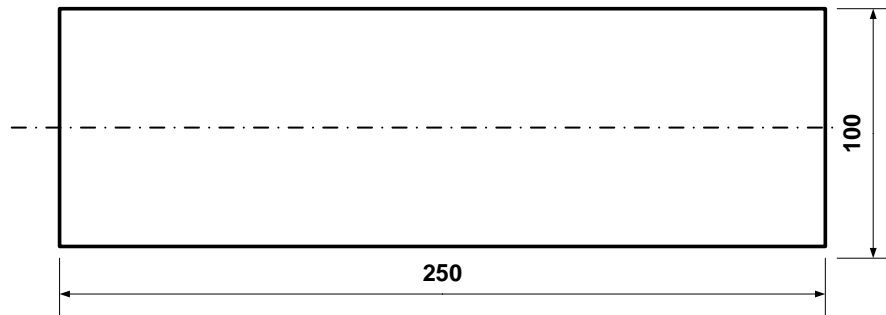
Panel geometry of the 2 mm butt welded plates
